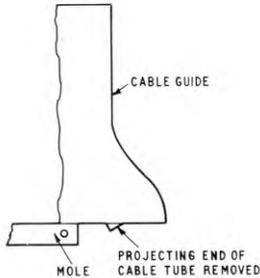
CABLE TUBE CUT AWAY TO ACCOMMODATE ATTACHMENT A
